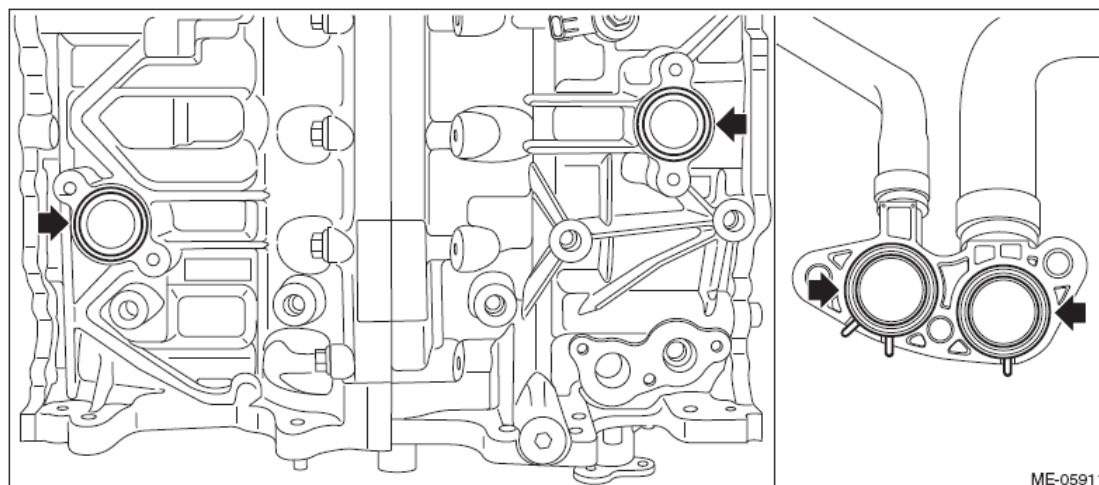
Locating Cylinder Block And PCV Connector O-ring
